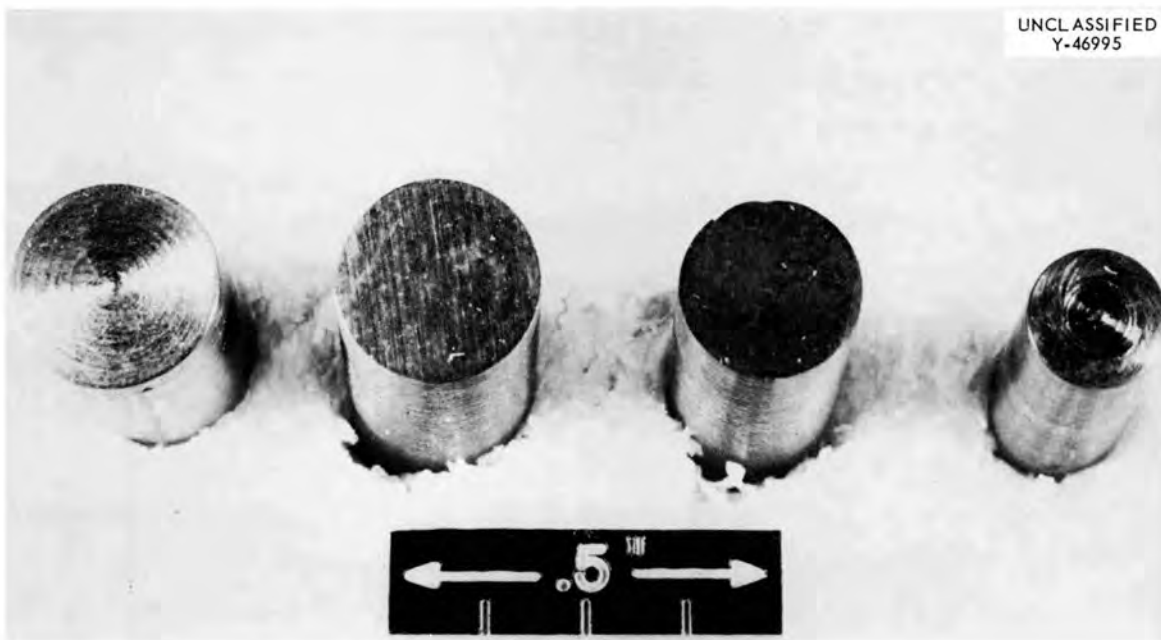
Machined Sections from 1050°C Swaged Rods Showing Bare Core.
